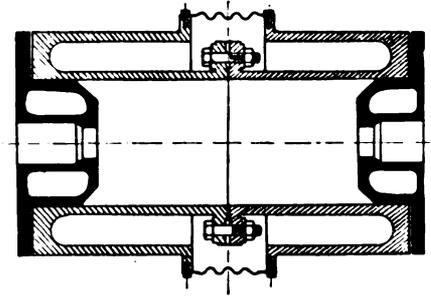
Section of Cylinder, Snow Steam Pump Works.
